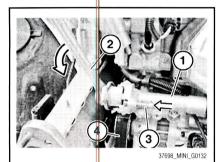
Secure assembly position of belt tensioner (1) by sliding locating pin (3) in direction of arrow. Remove wrench (2). Remove drive belt (4) from alternator
